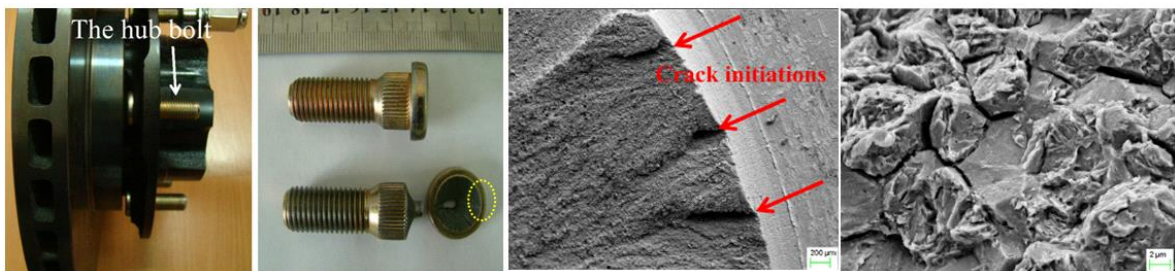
Field case of HE of break hub disk bolt and fractography [132].
